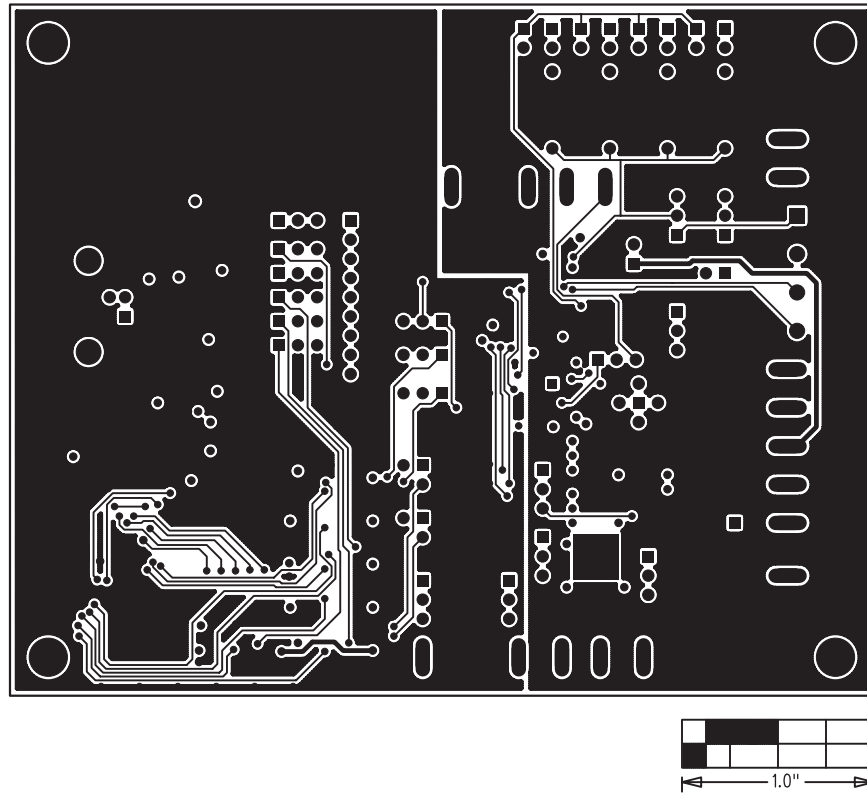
MAX15501 EV Kit PCB Layout—Solder Side
